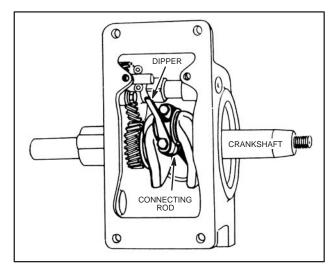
GENERAL VIEW OF ROD ASSEMBLY
